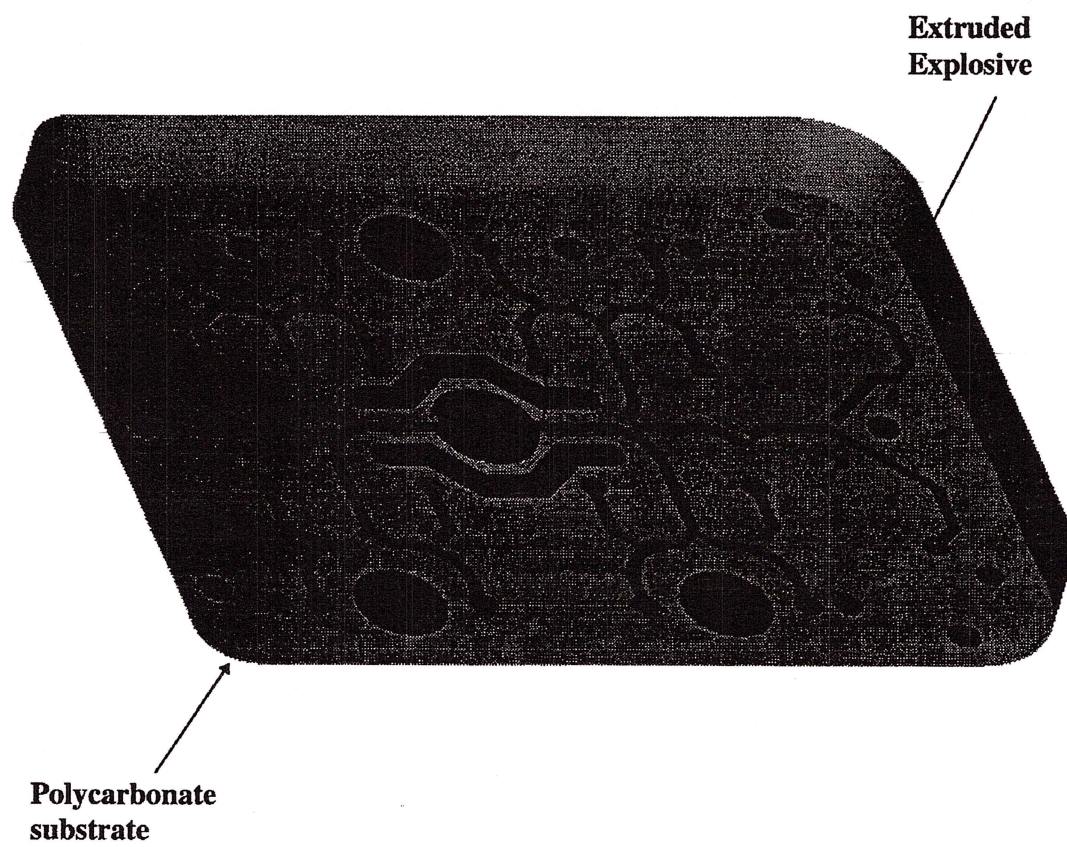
The track plate from the MC2368 explosive lens sub-assembly.
